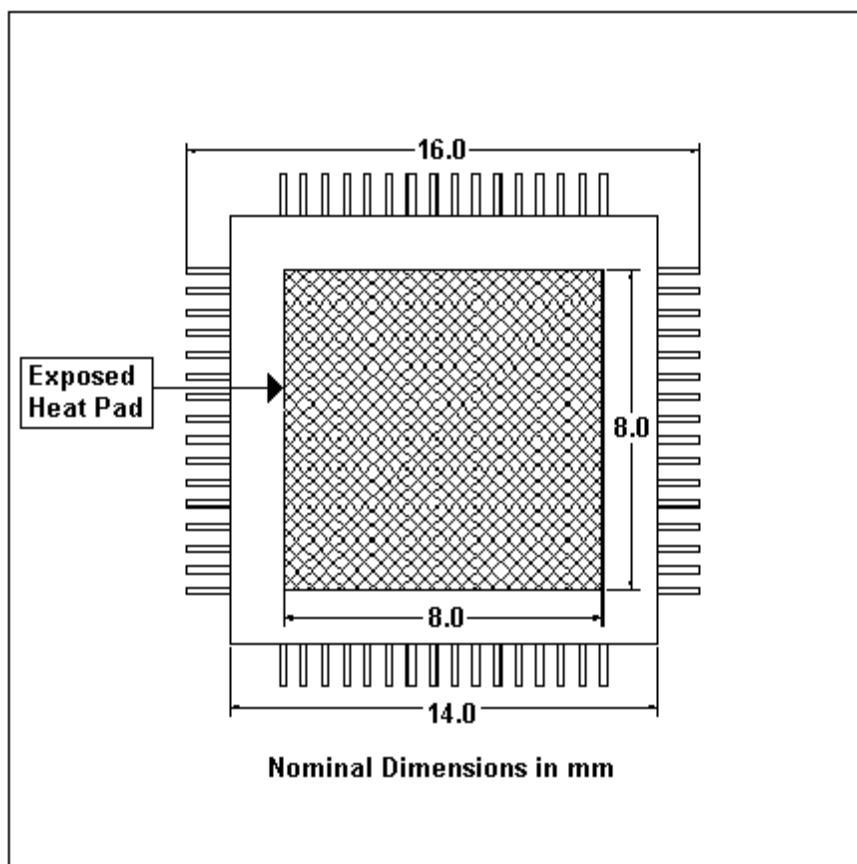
Bottom View of Thermally Enhanced 100-pin TQFP Package
